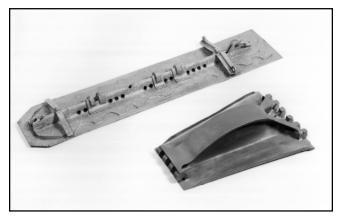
Jet engine castings first hand-constructed from wax sheets by a skilled patternmaker in the early 1980s.
